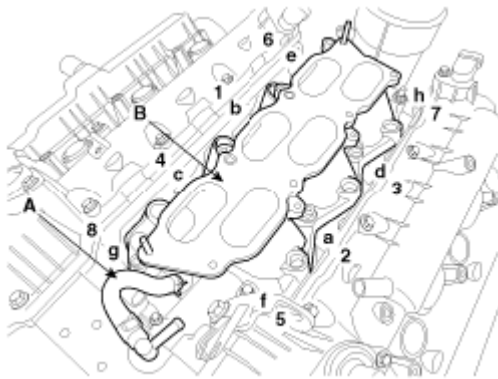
Identifying 1st Step Order & 2nd Step Order
